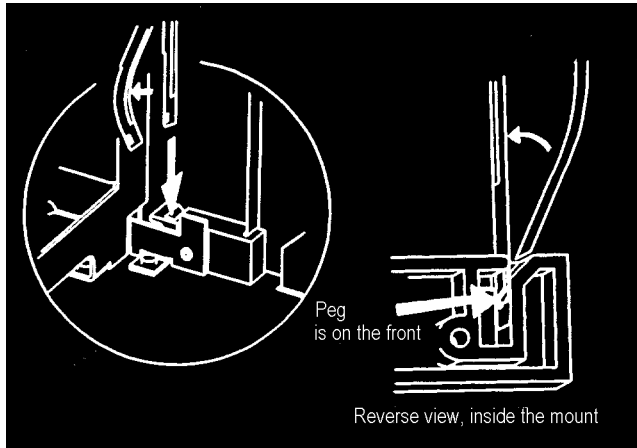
Retaining Peg on the Bottom of the Vertical Encoder Strip
